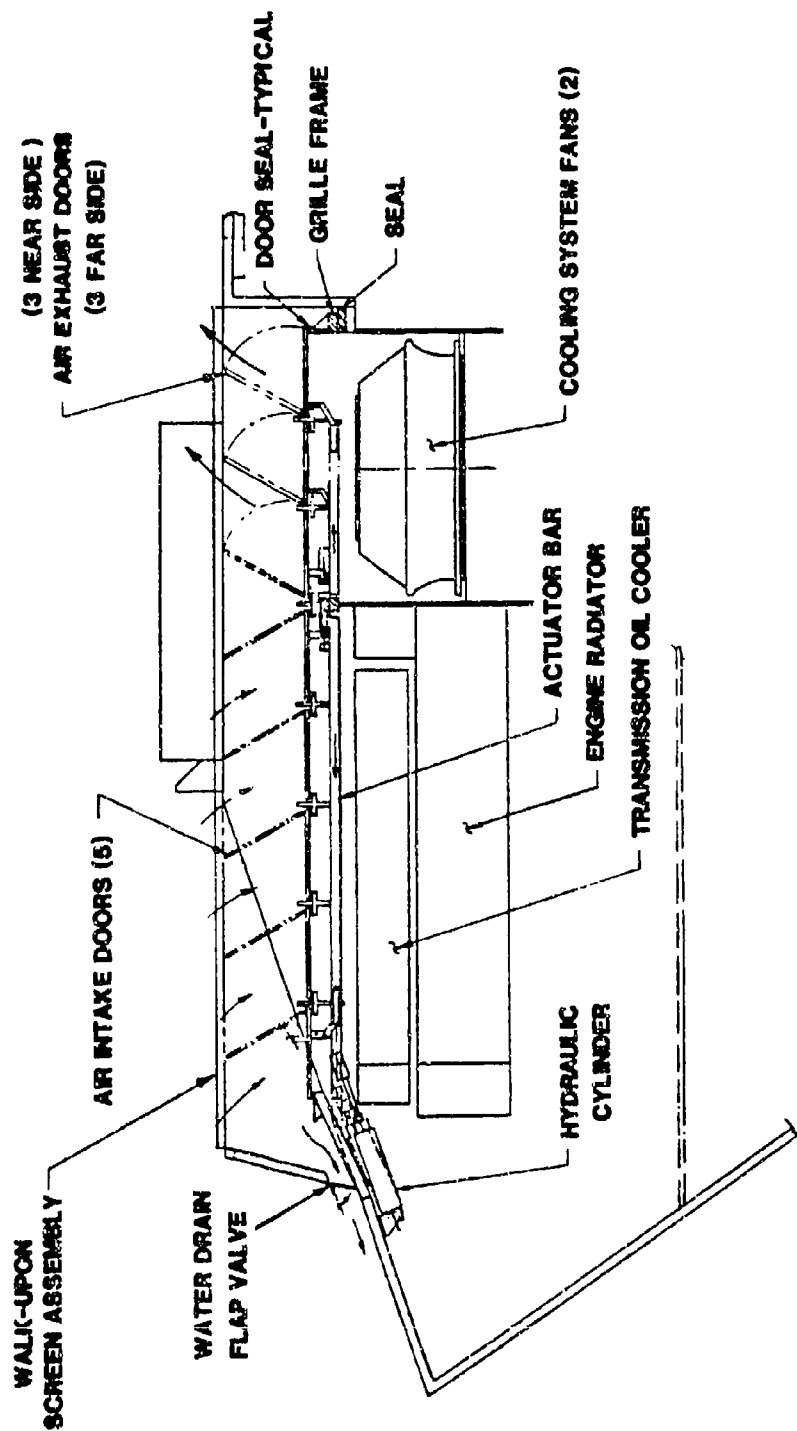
Grille Assembly With Louver Door Closure Mechanism
